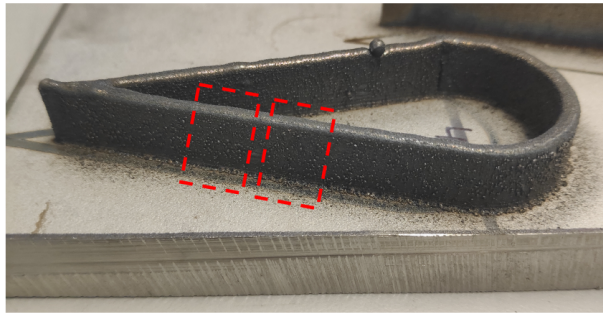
Two cross-sections taken from each sample from one of the straight walls of the sample shown in red dashed boxes
